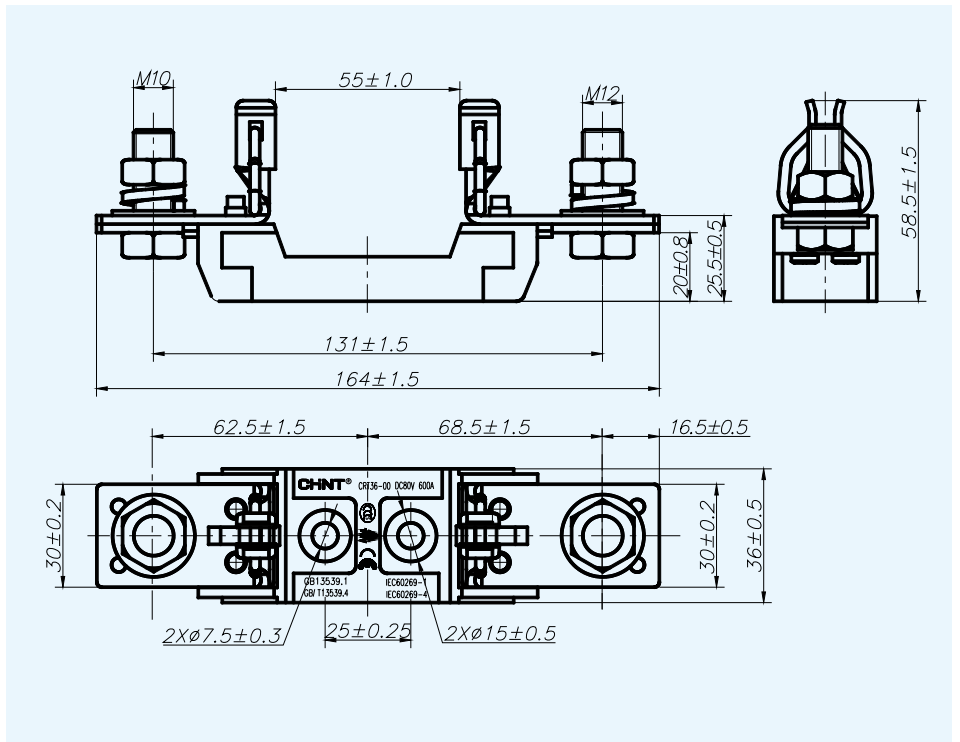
Overall dimensions of CRT36-00 600(400)A base
